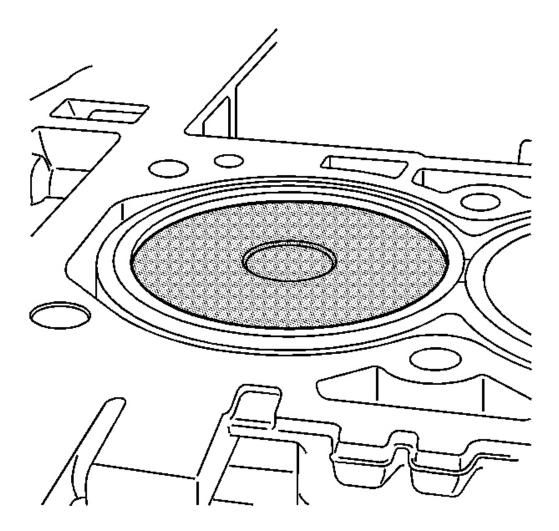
Identifying Catch Plug Positioning Courtesy of GENERAL MOTORS CORP.
